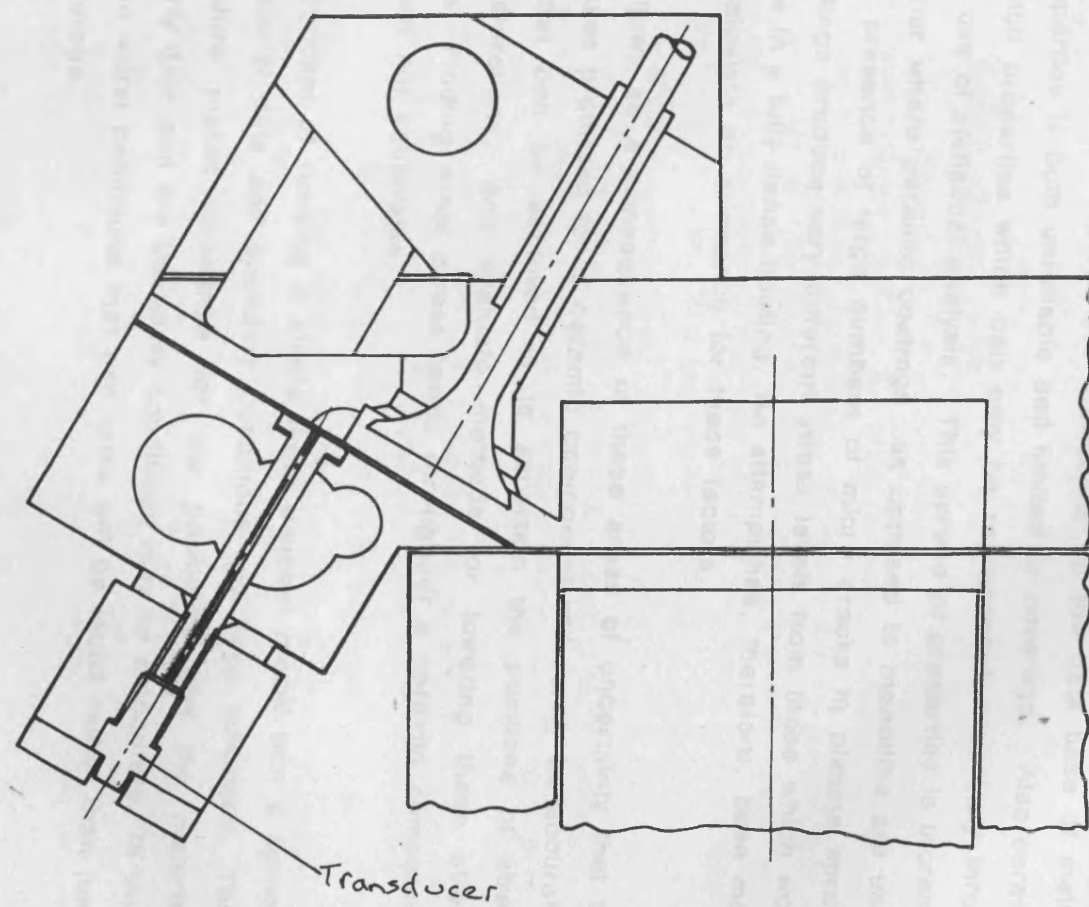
CROSS SECTION OF CYLINDER HEAD SHOWING TRANSDUCER MOUNTING.
